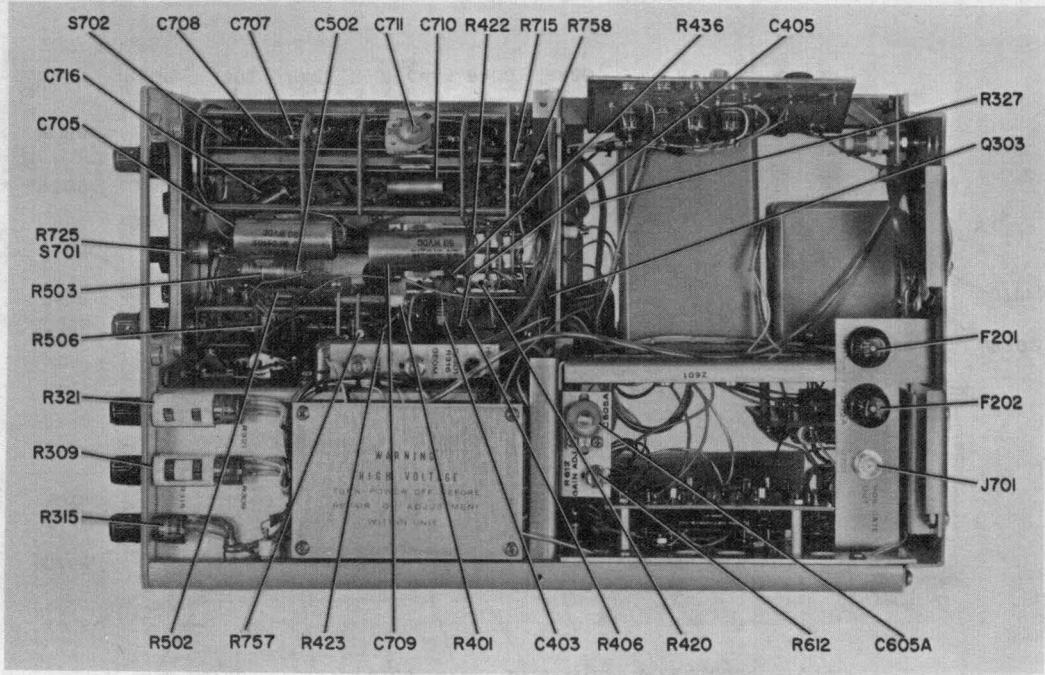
Oscilloscope AN/USM-117C, Chassis Assembly, Top View
